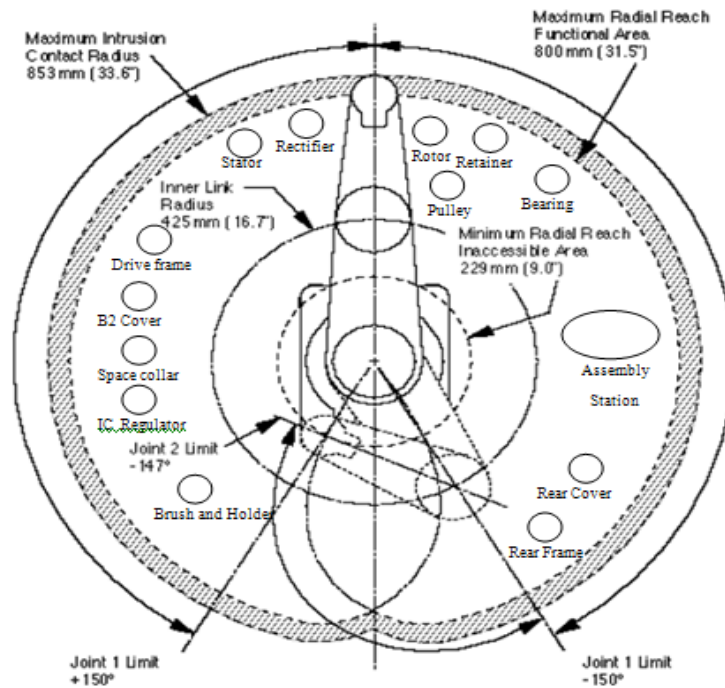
Workcell-1 for car alternator assembly with Adept-one Robot
